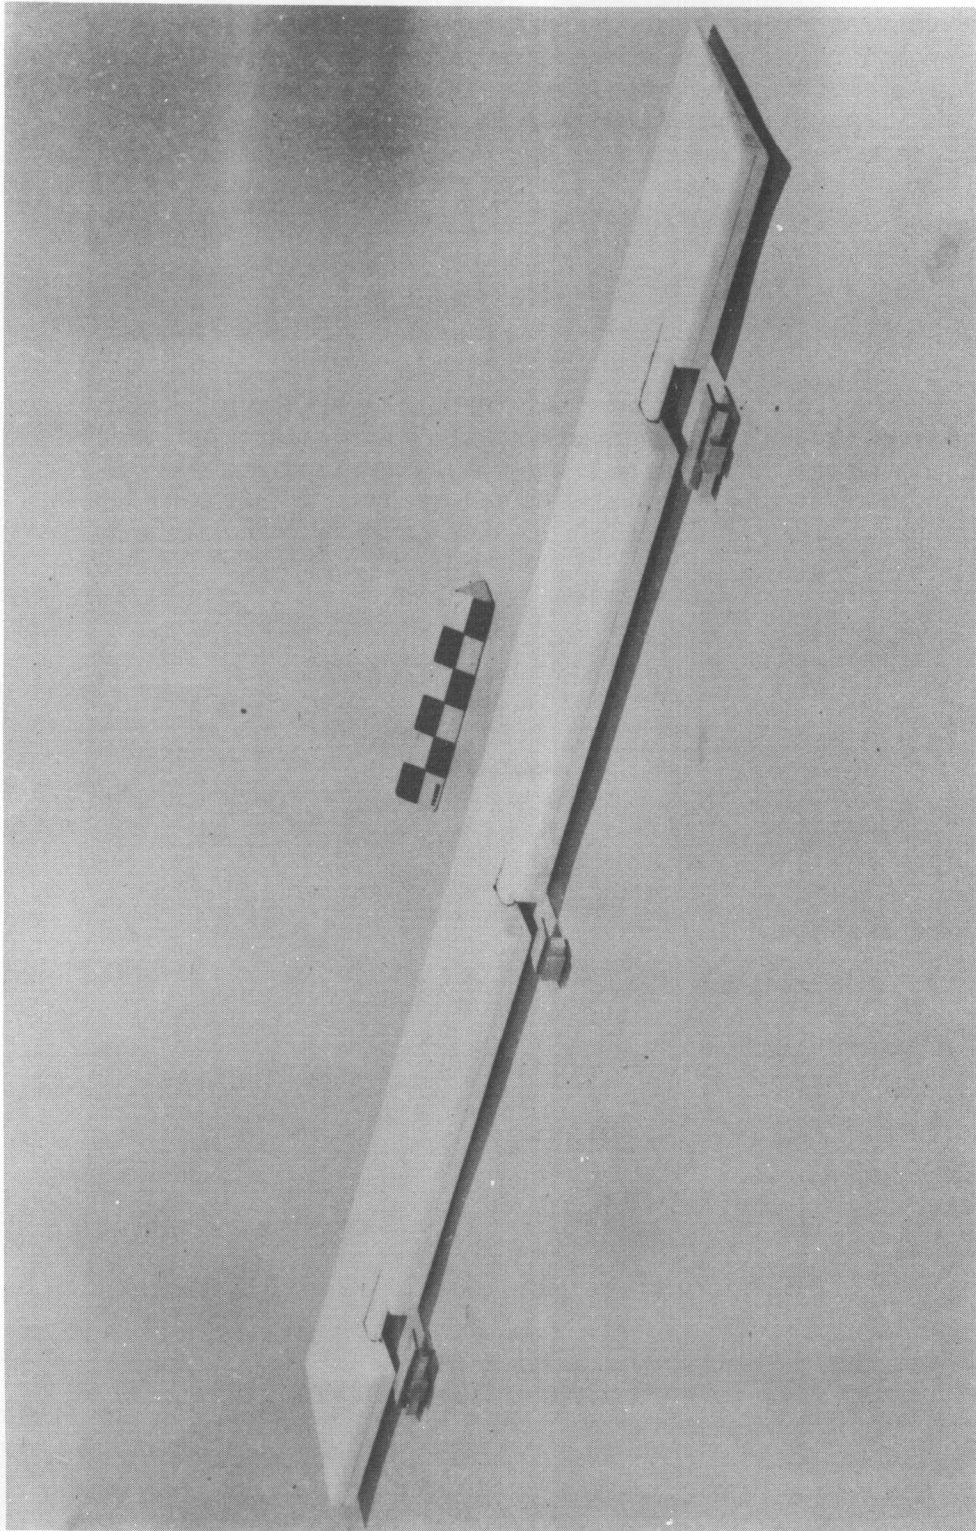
AN EXPLODED VIEW OF THE AILERON
